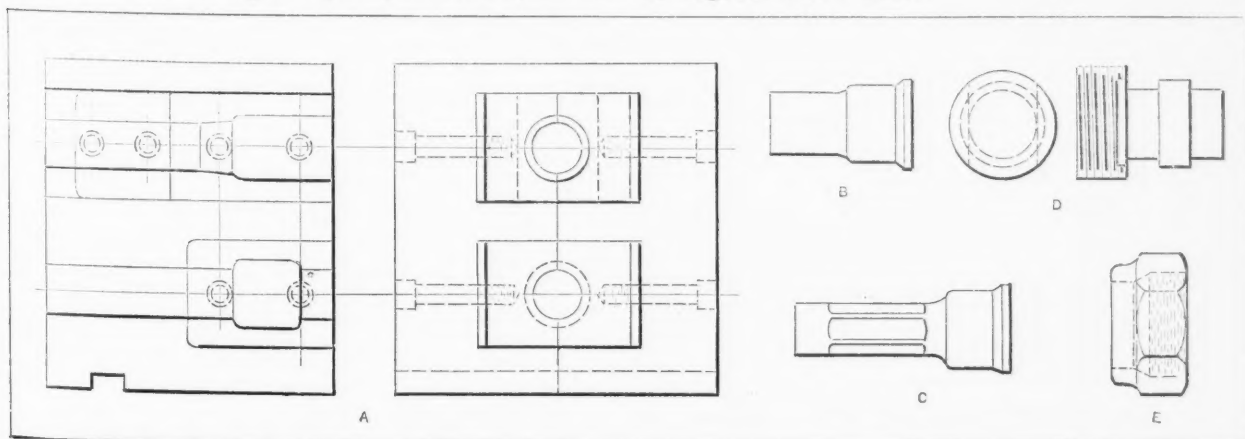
Design of the Dies and Tools Used in Forging Couplings in Two Steps in a Forging Machine
